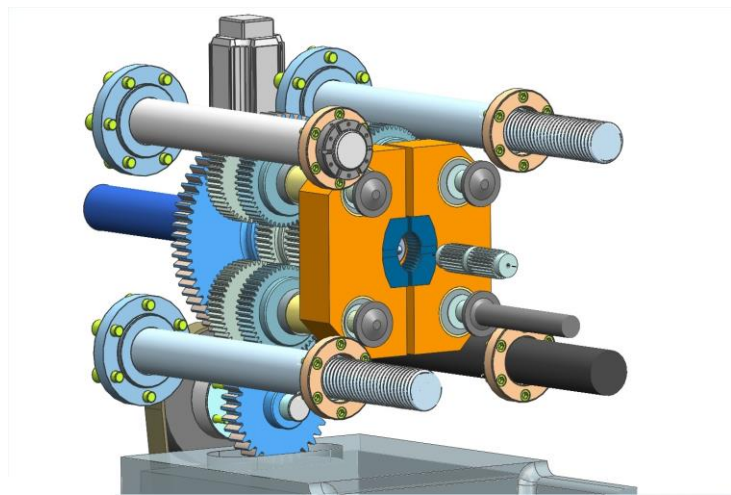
Tool Movement / Four Eccentric Shafts/Left Auxiliary Drive
